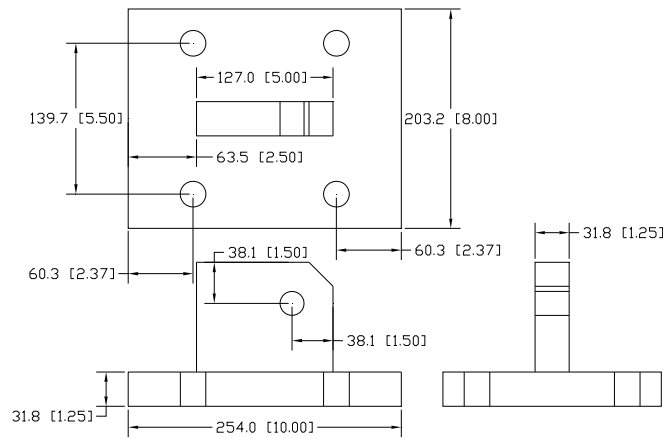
Padeye dimensions for AQ tests. Units in mm (in.).
